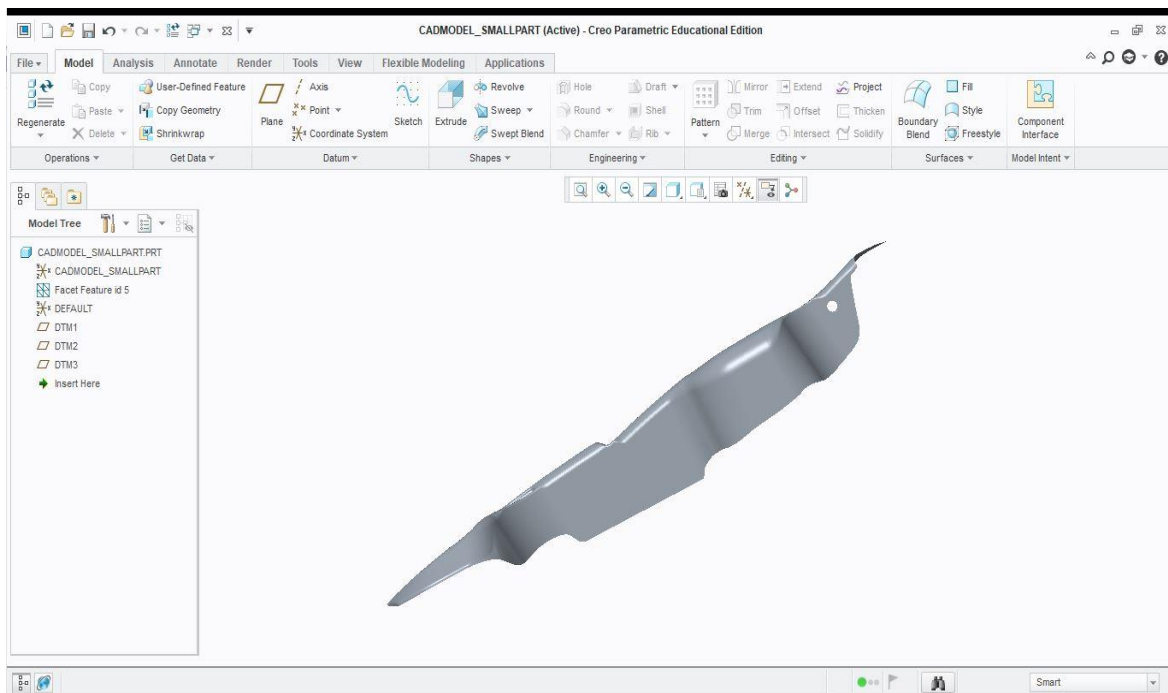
CAD Model after removing the extra assembly part.[Creo,2020]
